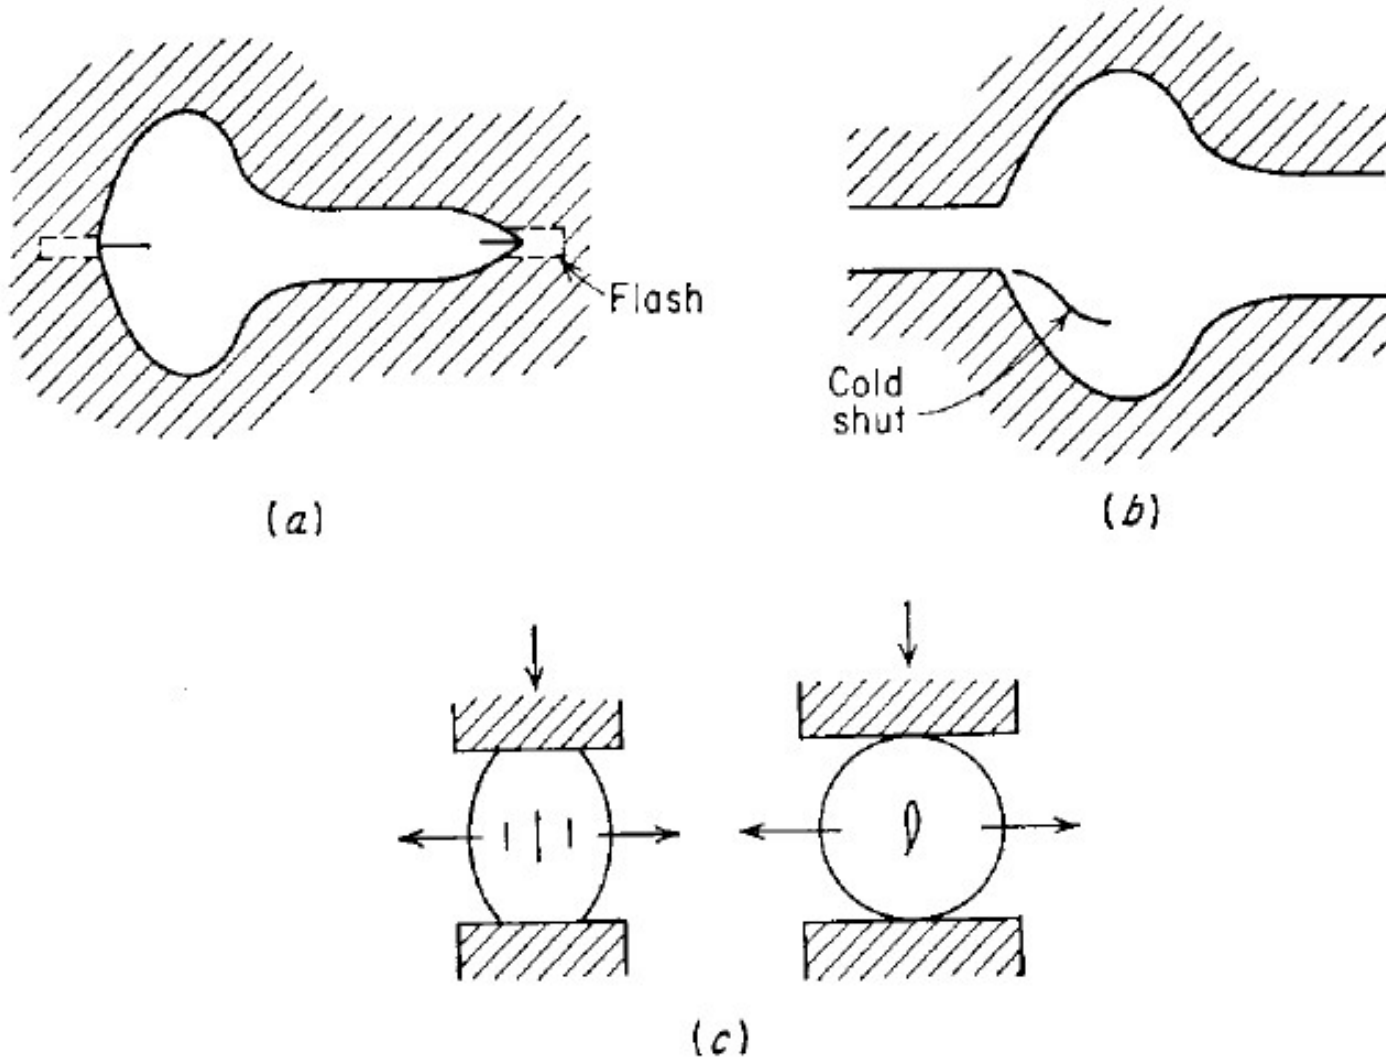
Typical forging defects. (a) Cracking at the flash; (b) cold shut or fold; (c) internal cracking due to secondary tensile stresses.
